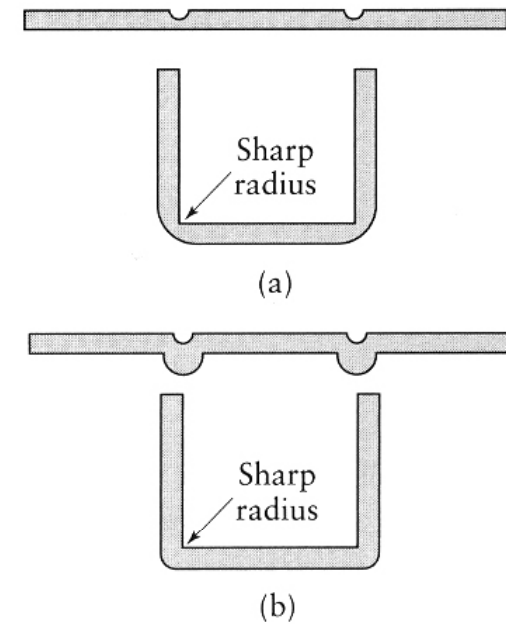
Application of (a) scoring or (b) embossing to obtain a sharp inner radius in bending. However, unless properly designed, these features can lead to fracture. *Source:* Society of Manufacturing Engineers.
